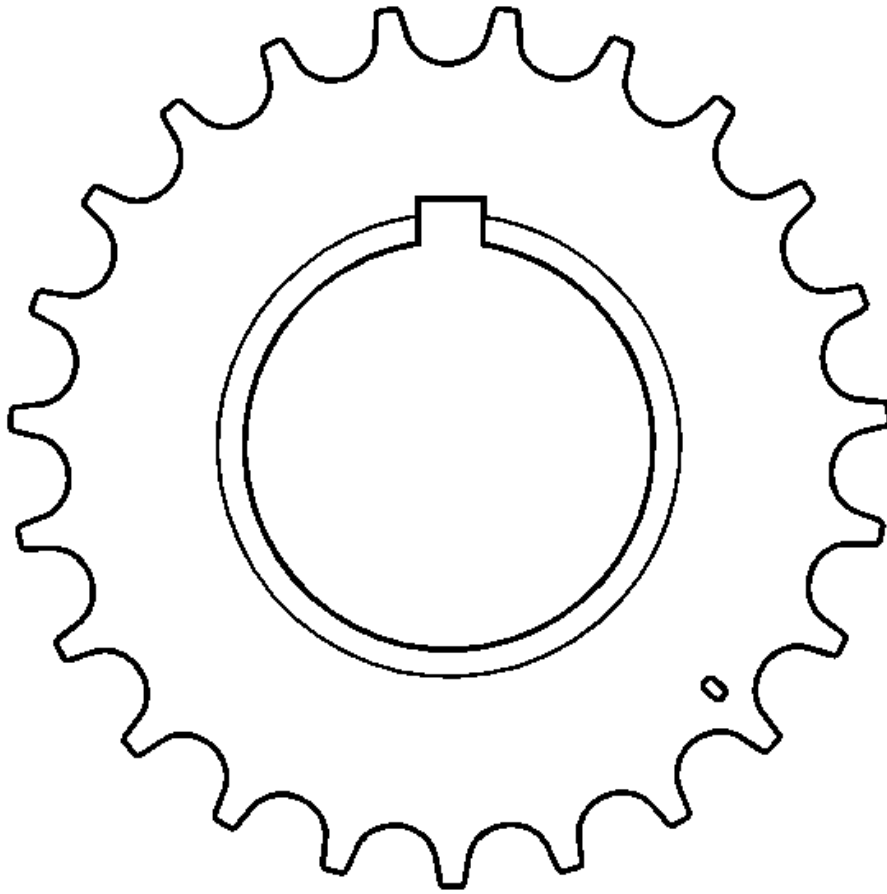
View Of Crankshaft Sprocket Timing Mark
